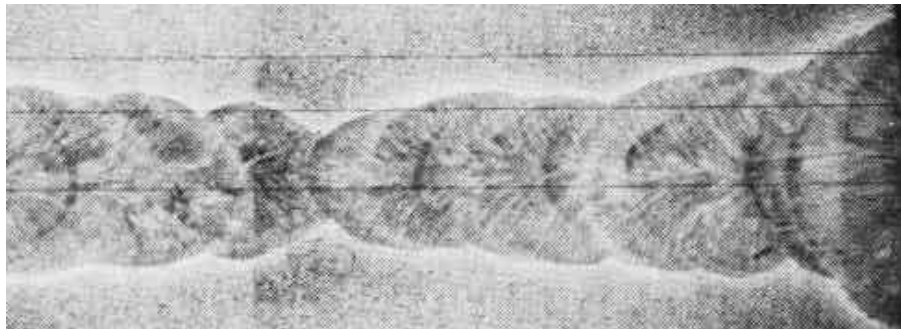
Narrow groove weld product in mechanized welding applications (Myers, 1992)
